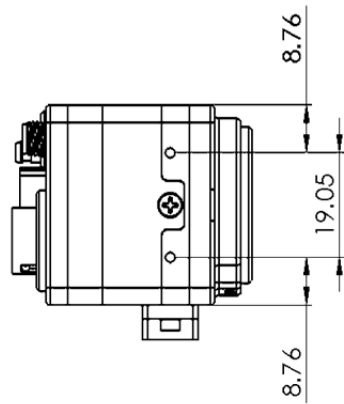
Tripod Mount Adapter 2-56 Mounting Location on side of NOCTURN XL (in mm)
